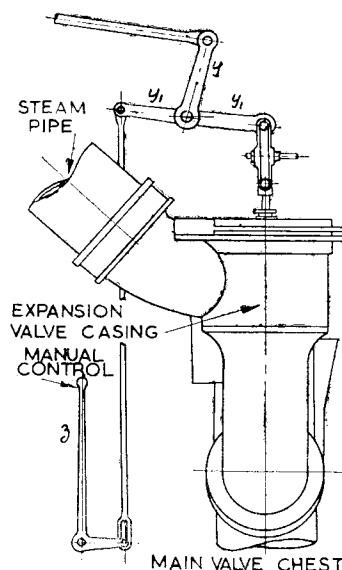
Improved gear with variable expansion fitted to later side-lever engines
